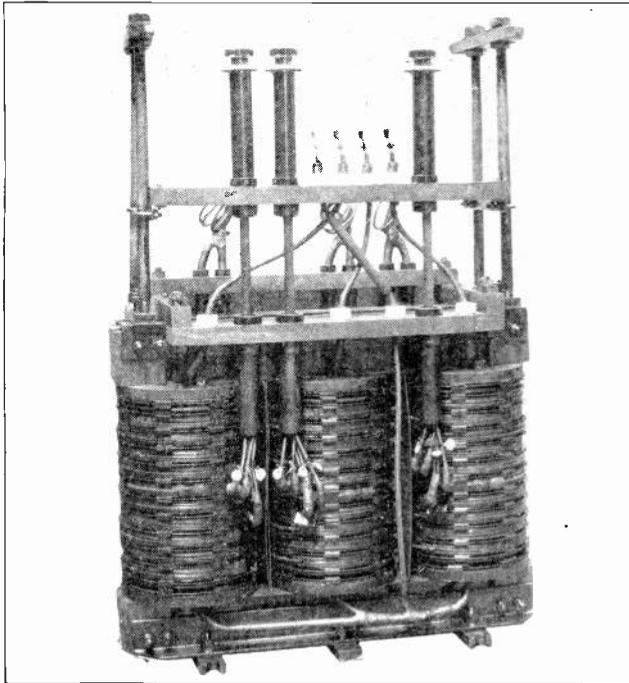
Complete three-phase transformer core and windings ready to be placed in the tank and covered with oil. (Photo courtesy General Electric Co.)
